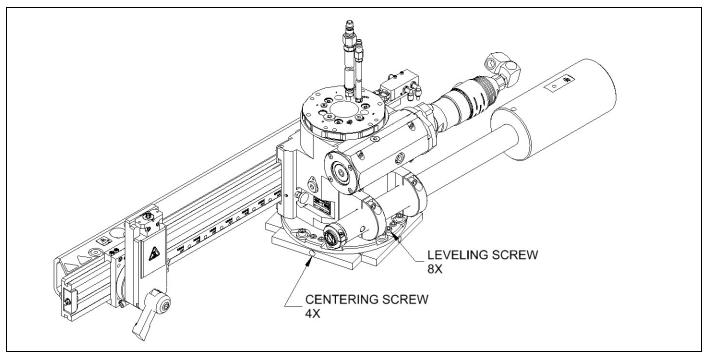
SURFACE MOUNT ASSEMBLY
